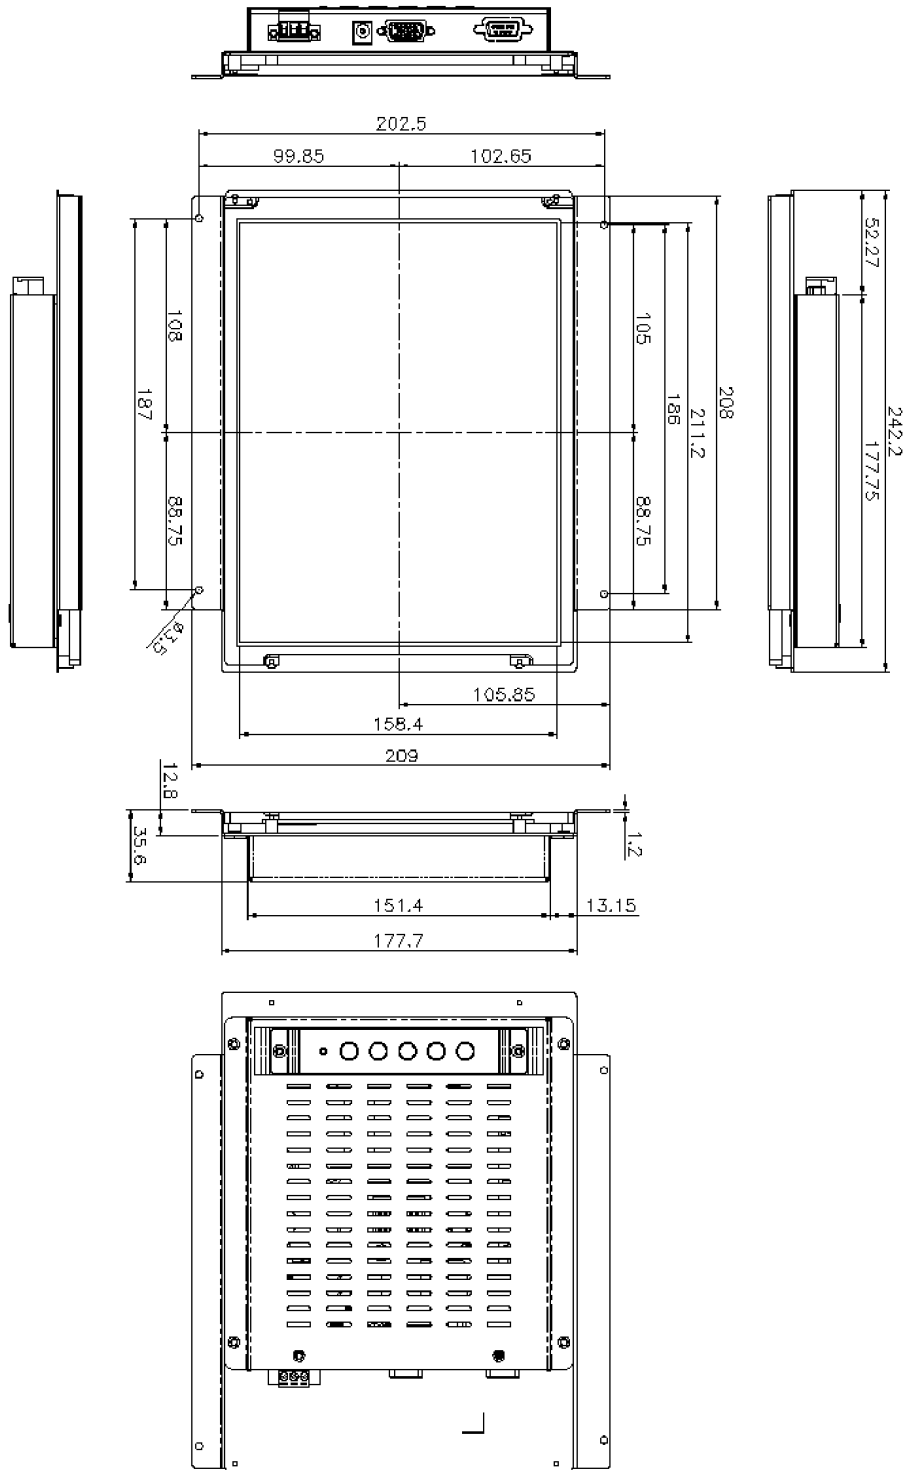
2007602 Physical Dimensions (millimeters)
